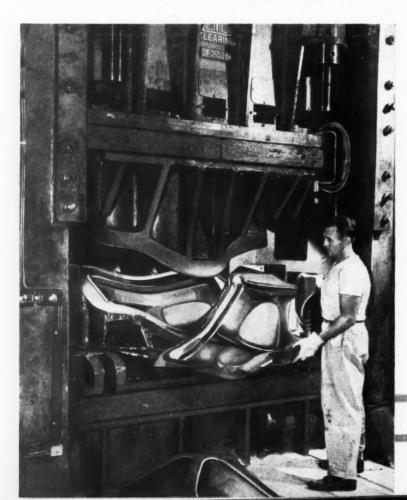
Intricate-shaped, deep-drawn grilles are produced from flat blanks 37 inches wide by 51 1/8 inches long on a 650-ton mechanical press
